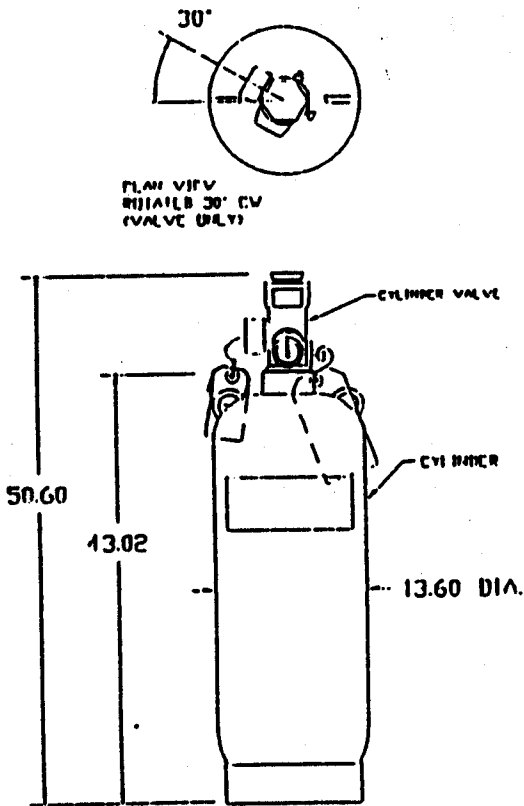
Halon 1301 Cylinder/Valve Assembly, 200 lb., Vertical Mount
